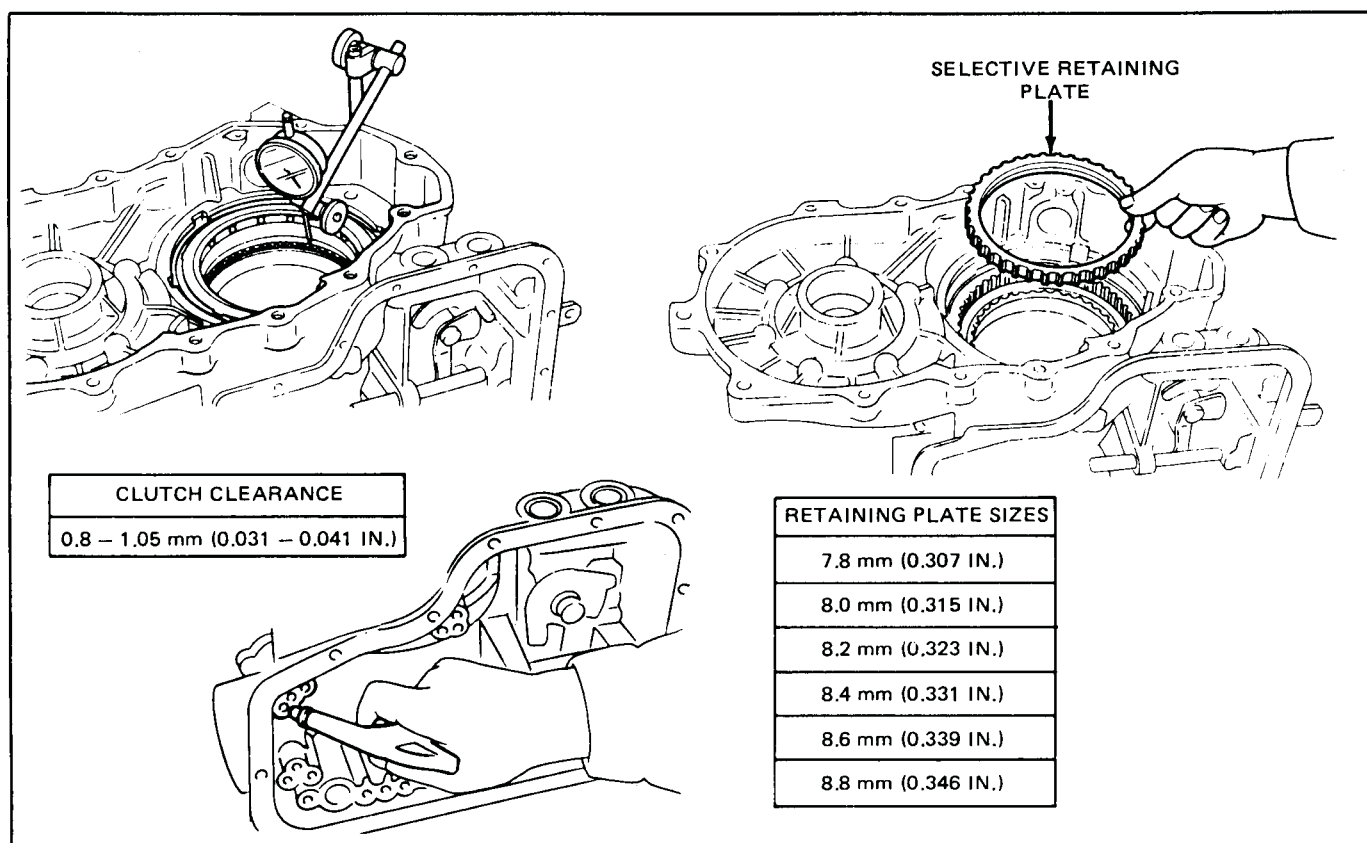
A-109 Measuring Low/Reverse Clutch Clearance
